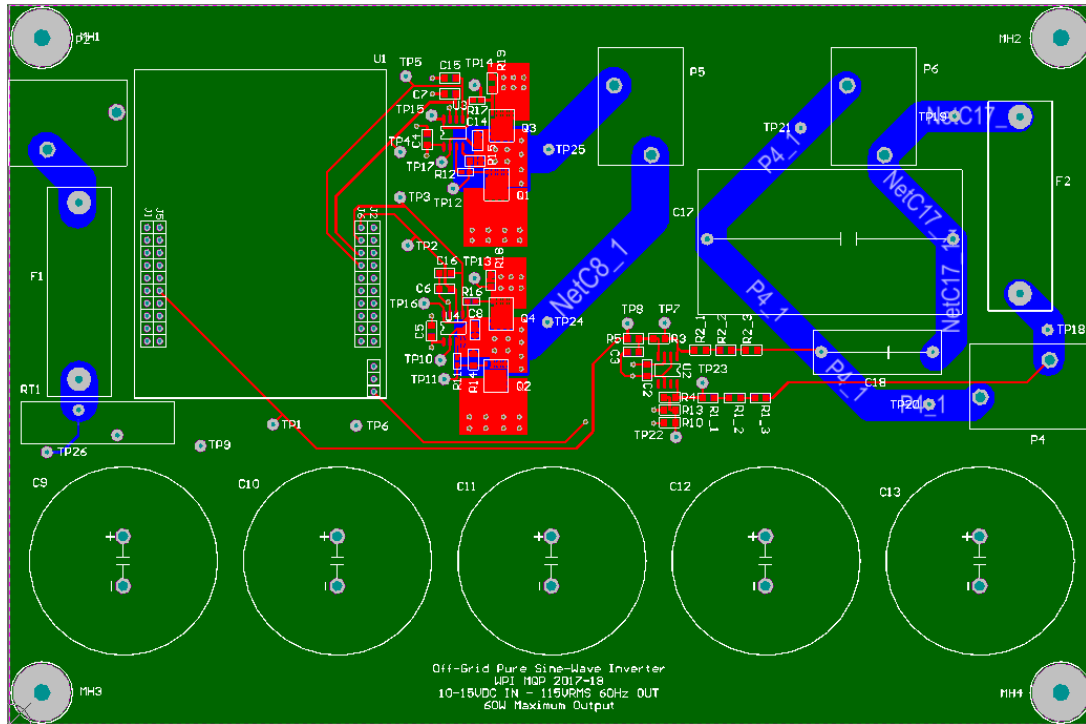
Layout for printed circuit board [218.44 x 144.78 x 2.11 mm]
